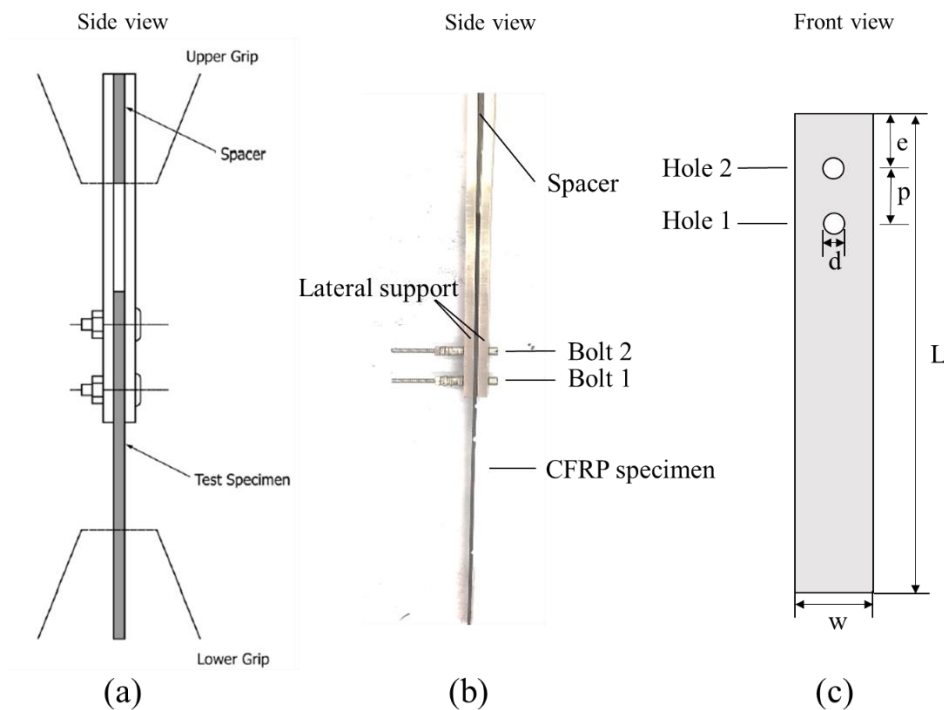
(a) Schematic diagram of a fixture assembly for a double-bolted joint test, suggested from ASTM D7248, (b) Photograph illustration of the fixture used in the testing and (c) schematic diagram of a double-bolted joint testing specimen drawing.
